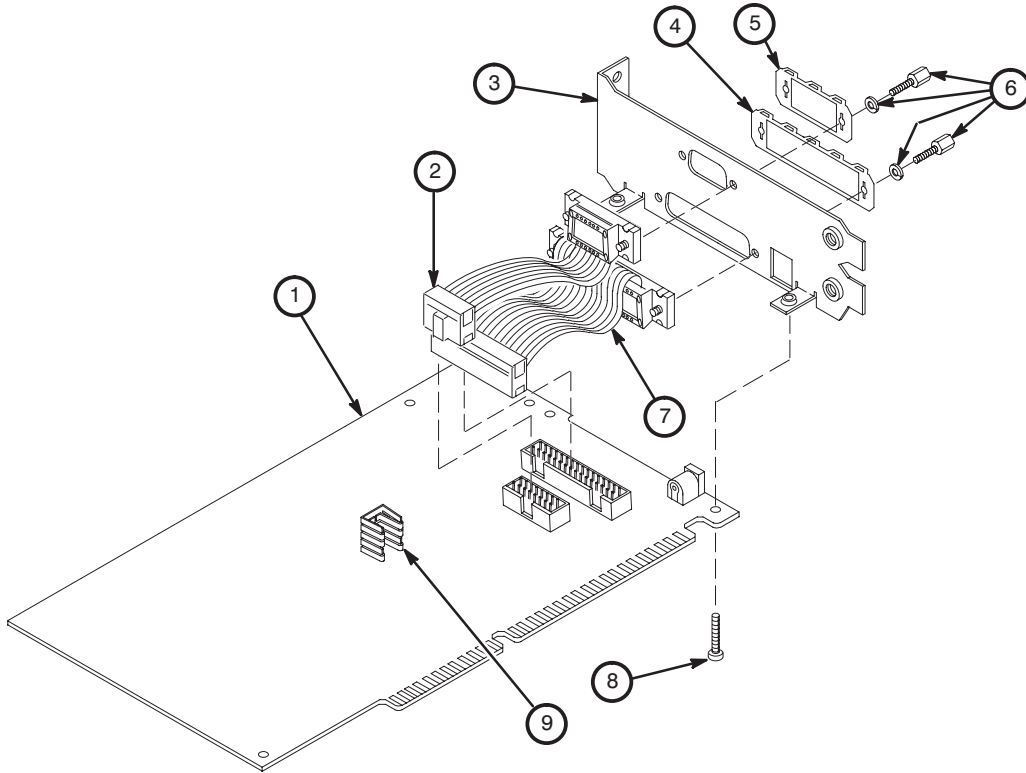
RS-232/Centronics Hardcopy Interface Replaceable Parts (TDS 400)
